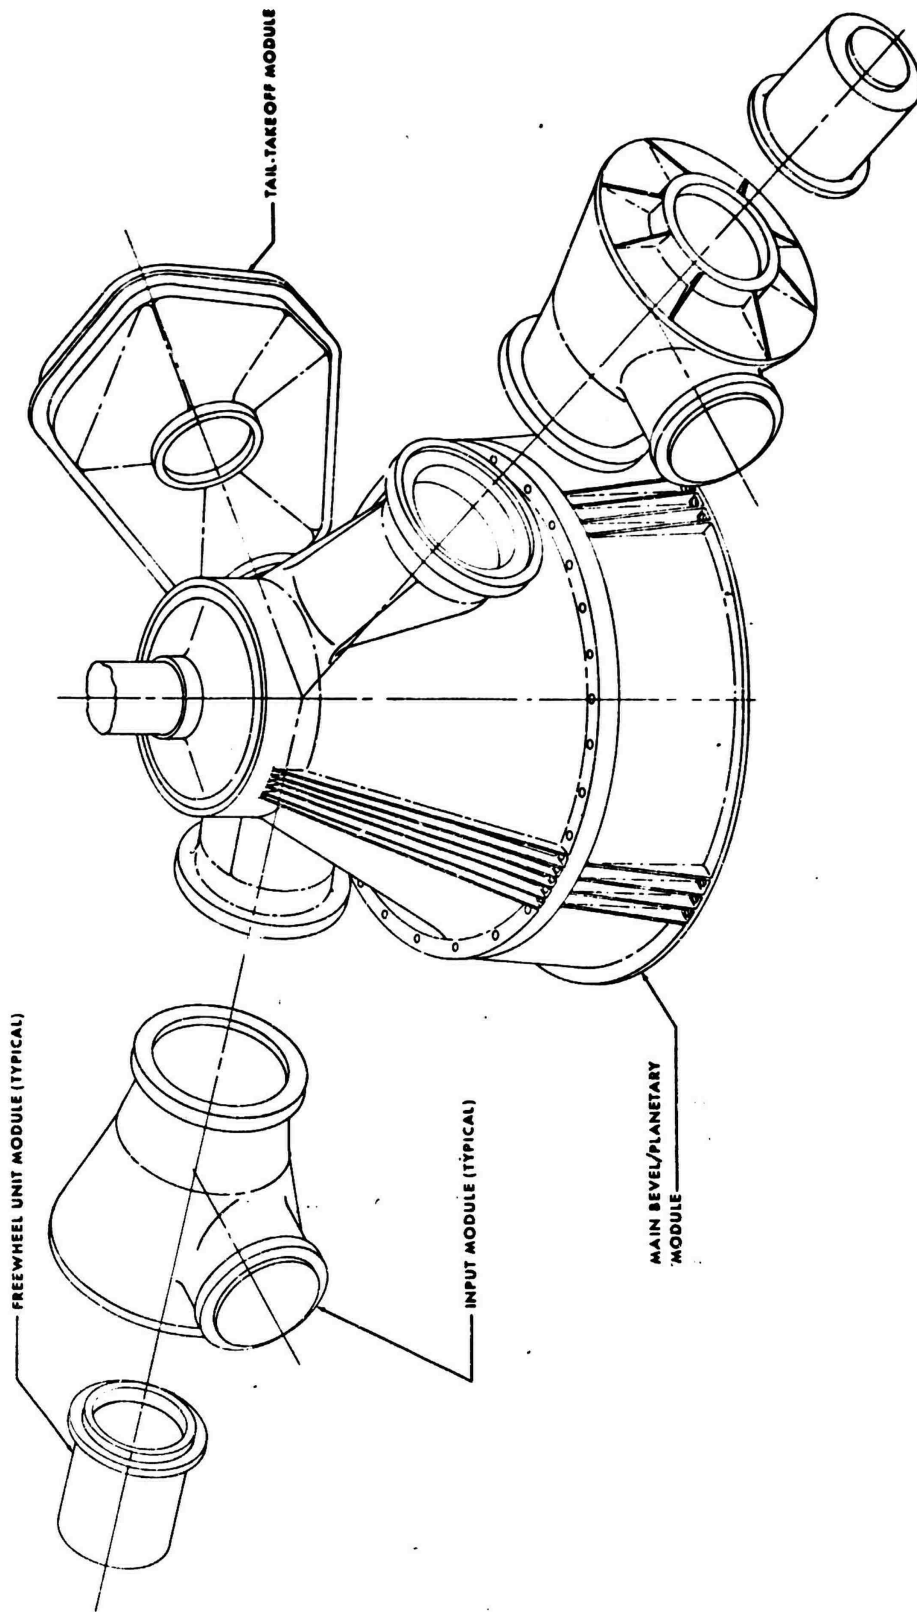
Exploded Isometric Drawing of CH-54 Main Transmission, Six-Module Configuration.
